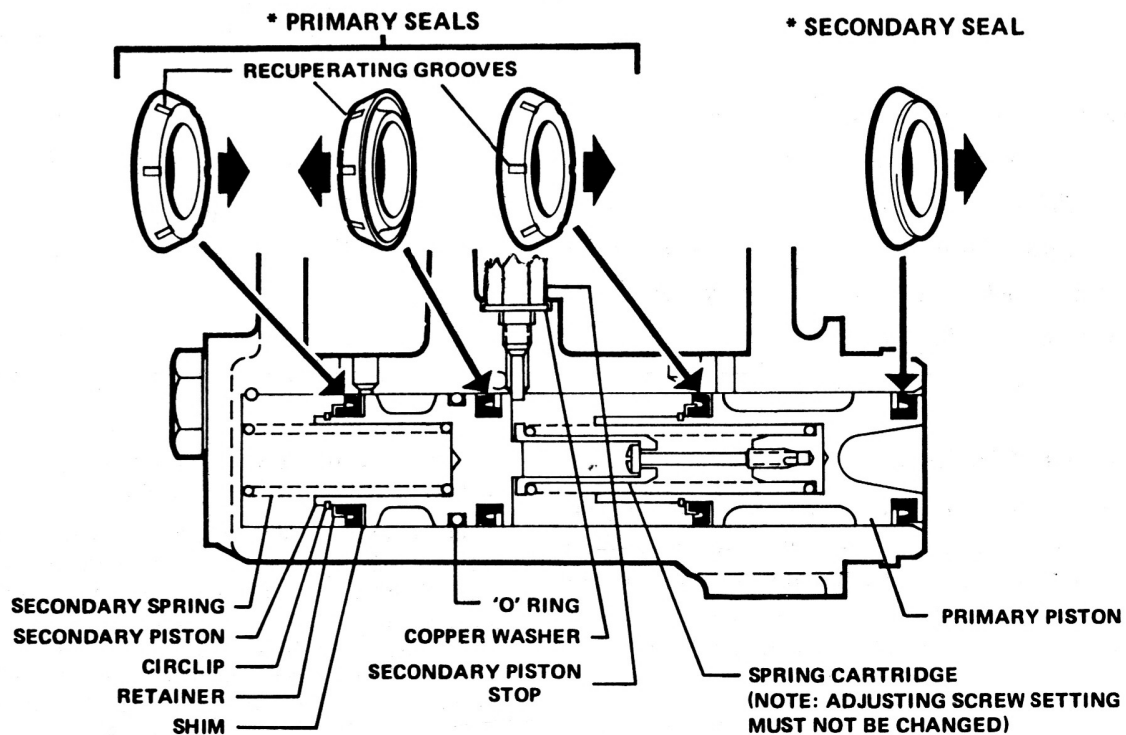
Cross sectional view of PBR Tandem brake master cylinder assembly
